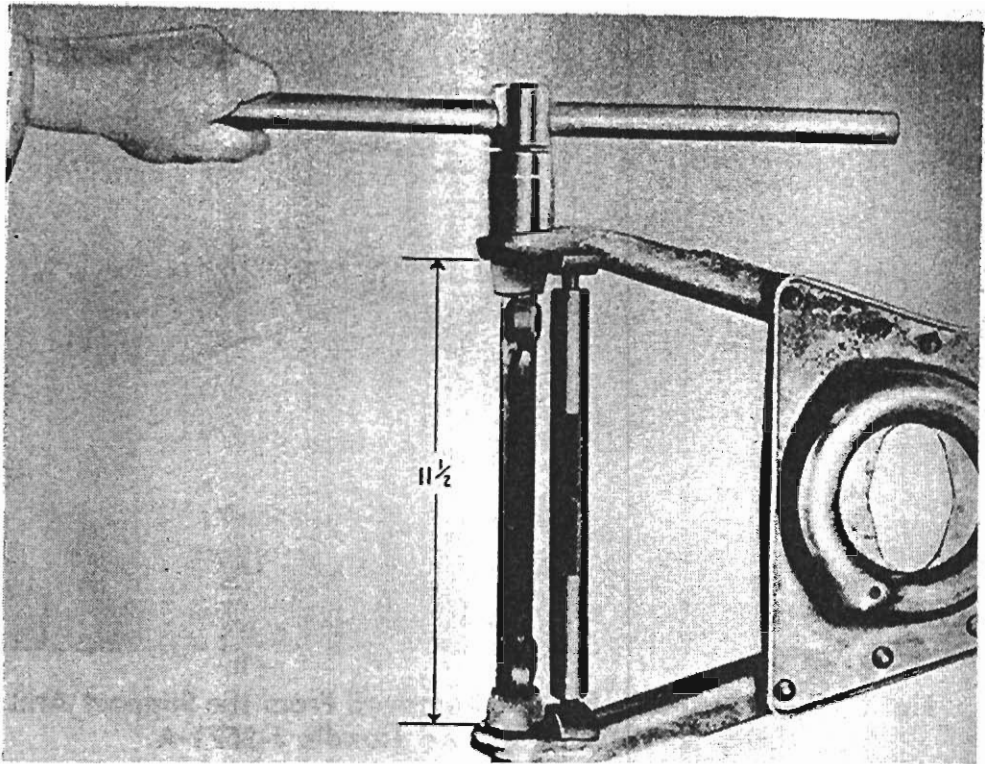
Support Arm Spreader J-1052 Should Be Used to Maintain Distance Shown.
